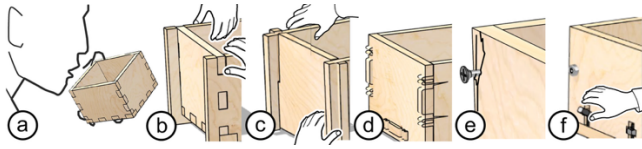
(a) One example of a Laser-cut object with tight box joints. Alternative joint designs have been proposed to make laser-cut 3D models more robust against tension, including (b) T-joints [3], (c) cross joints [8], (d) snap-fits [4], (e) wood screws, and (f) captive nut joints [8].
